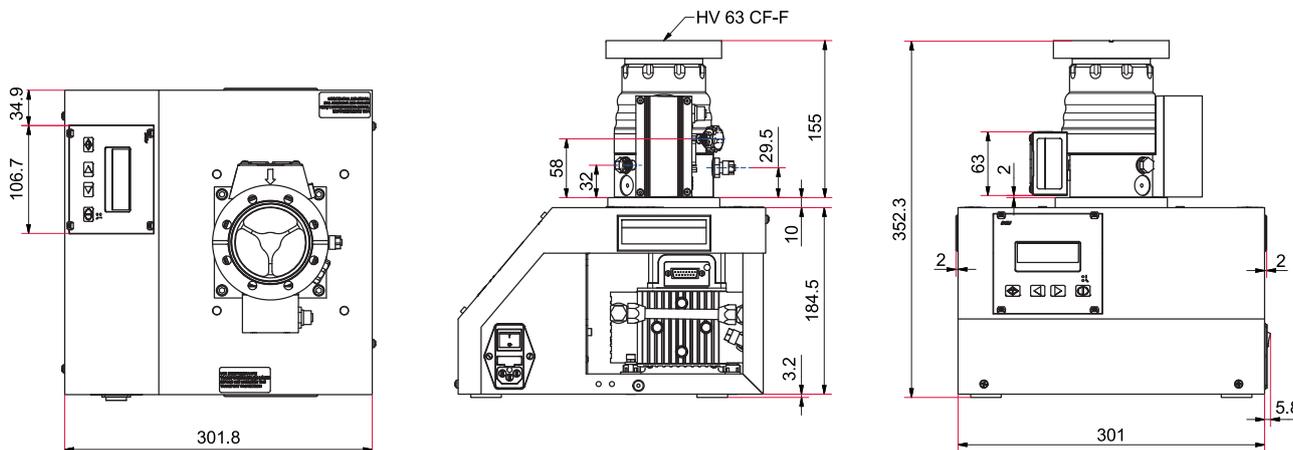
Dimensions of HiCube 80 Eco, DN 63 CF-F
